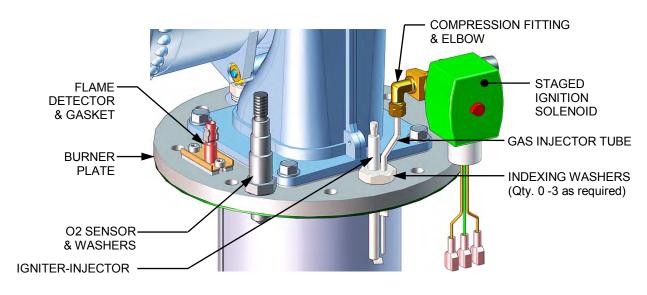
Staged Ignition Connection to Gas Injector Tube
